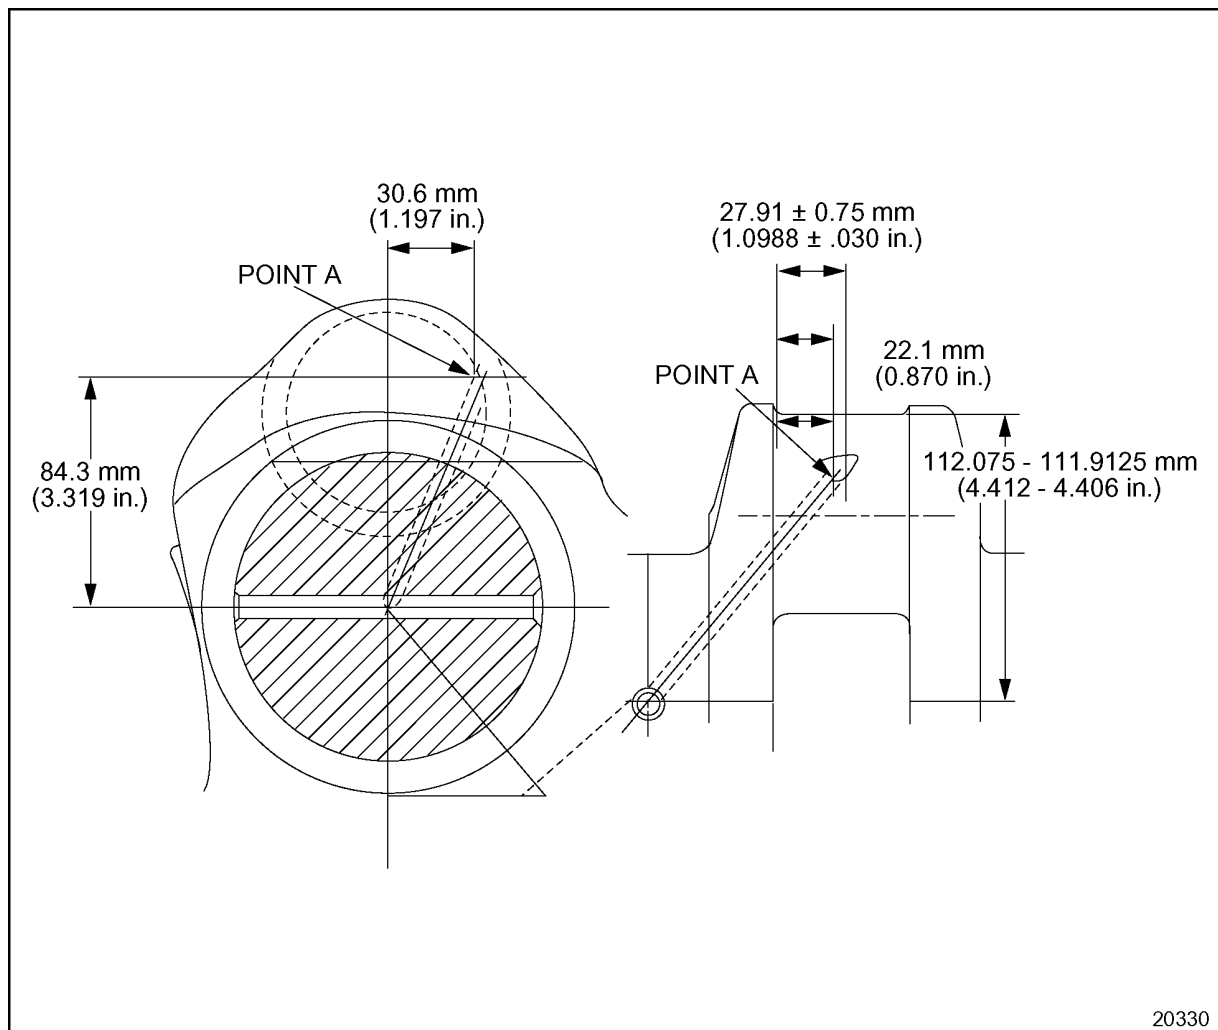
Oil Hole Specifications - Connecting Rod Journals - Crankshaft (160 mm stroke)
